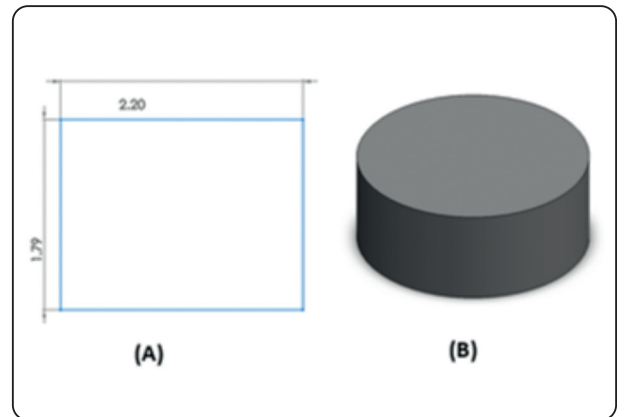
(A) Sketch for half the metal housing with dimensions, (B) final model of the metal housing
